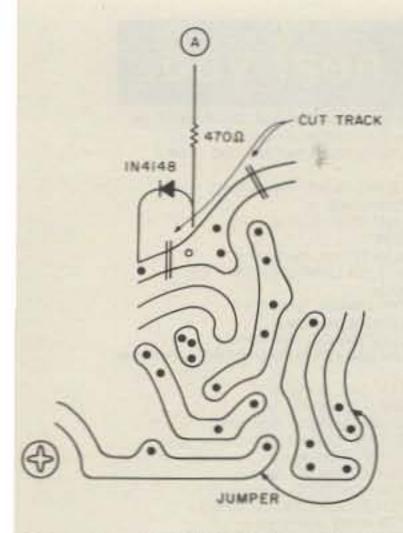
A 1N4148 diode mounts on the foil side, while the 470-Ohm resistor mounts on component side next to 1103.
